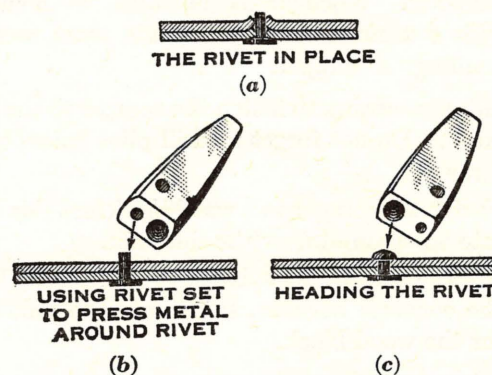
Riveting. (a) The rivet in place. (b) Using a rivet set to press the metal around the rivet. (c) Heading the rivet
